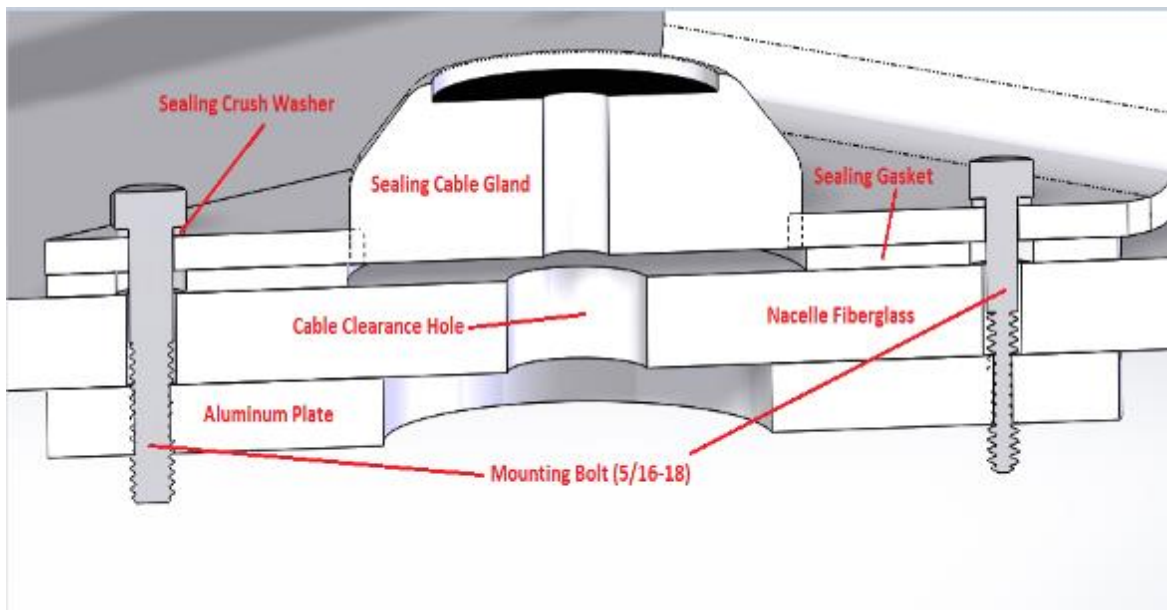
Image of the cross section for the external bracket (top) and internal mounting plate (bottom) with the fiberglass nacelle in between.
